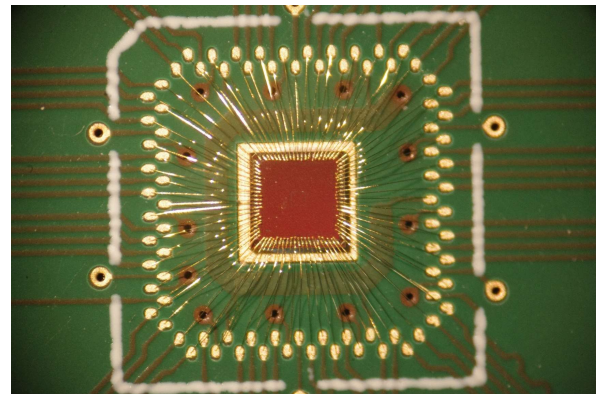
Photograph of the ASIC mounted on the carrier PCB
